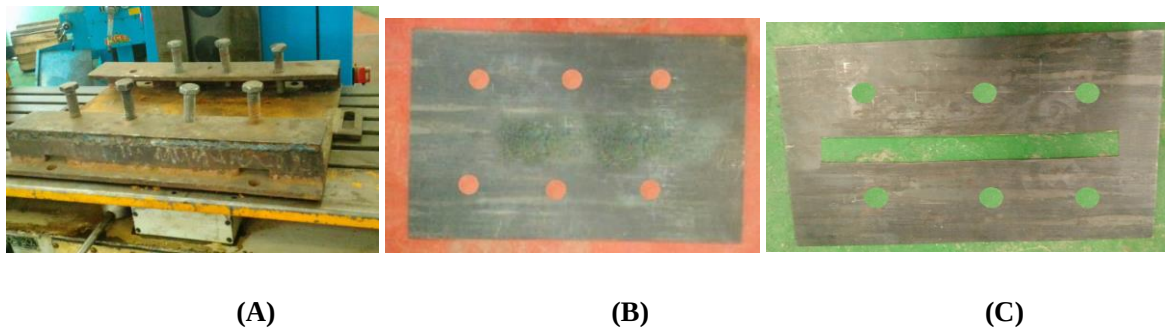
Fixture on bed of CVVM (A) Top backing plate (B) and bottom backing plates (C) after FSW performed on CVMM
